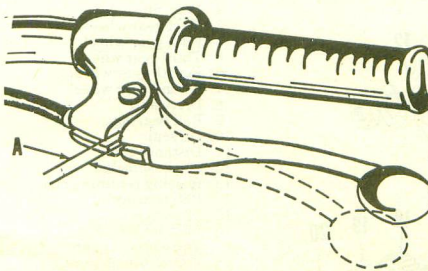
Adjust clutch cable to obtain 2-3mm free play at (A).
